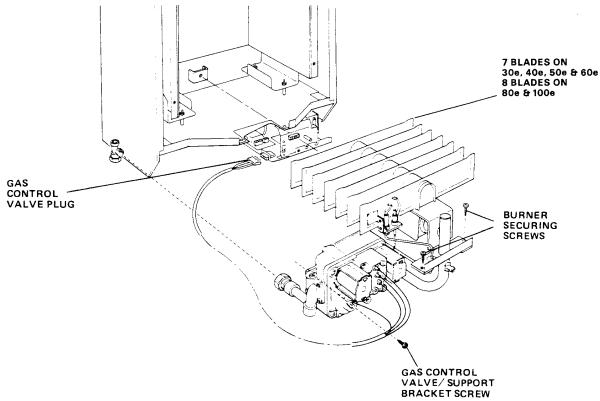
BURNER AND GAS CONTROL ASSEMBLY
